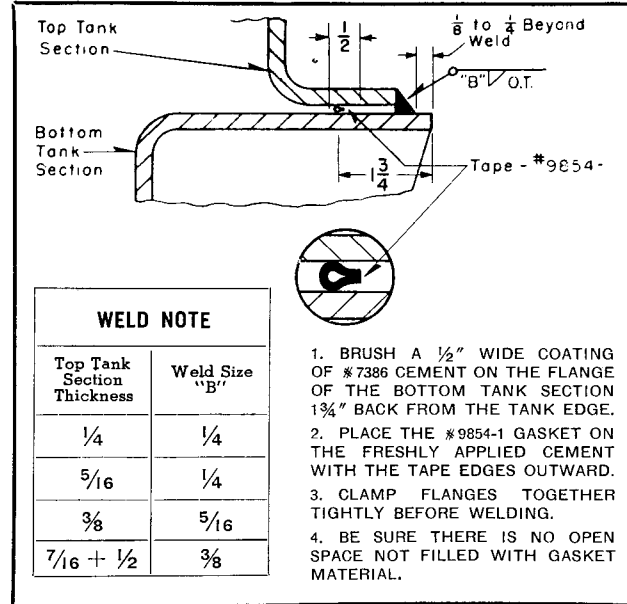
Joining of Flanges, "Form-Fit" Tank.
